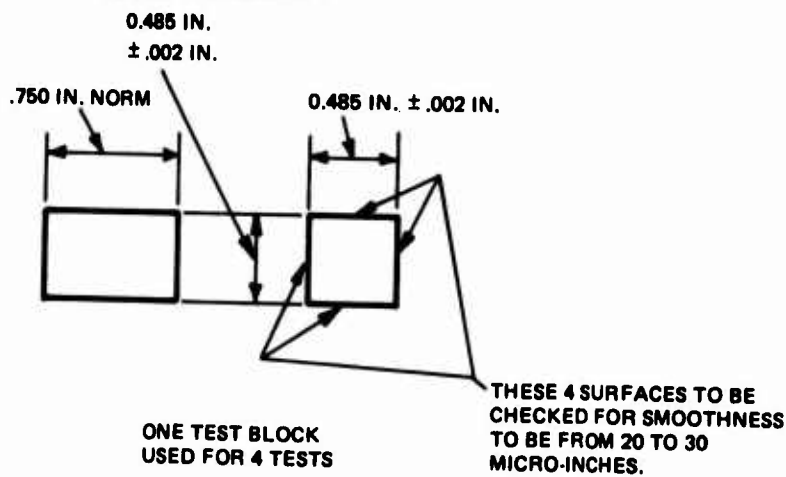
Test Block for Timken Lubricant and Wear Test Machine.
